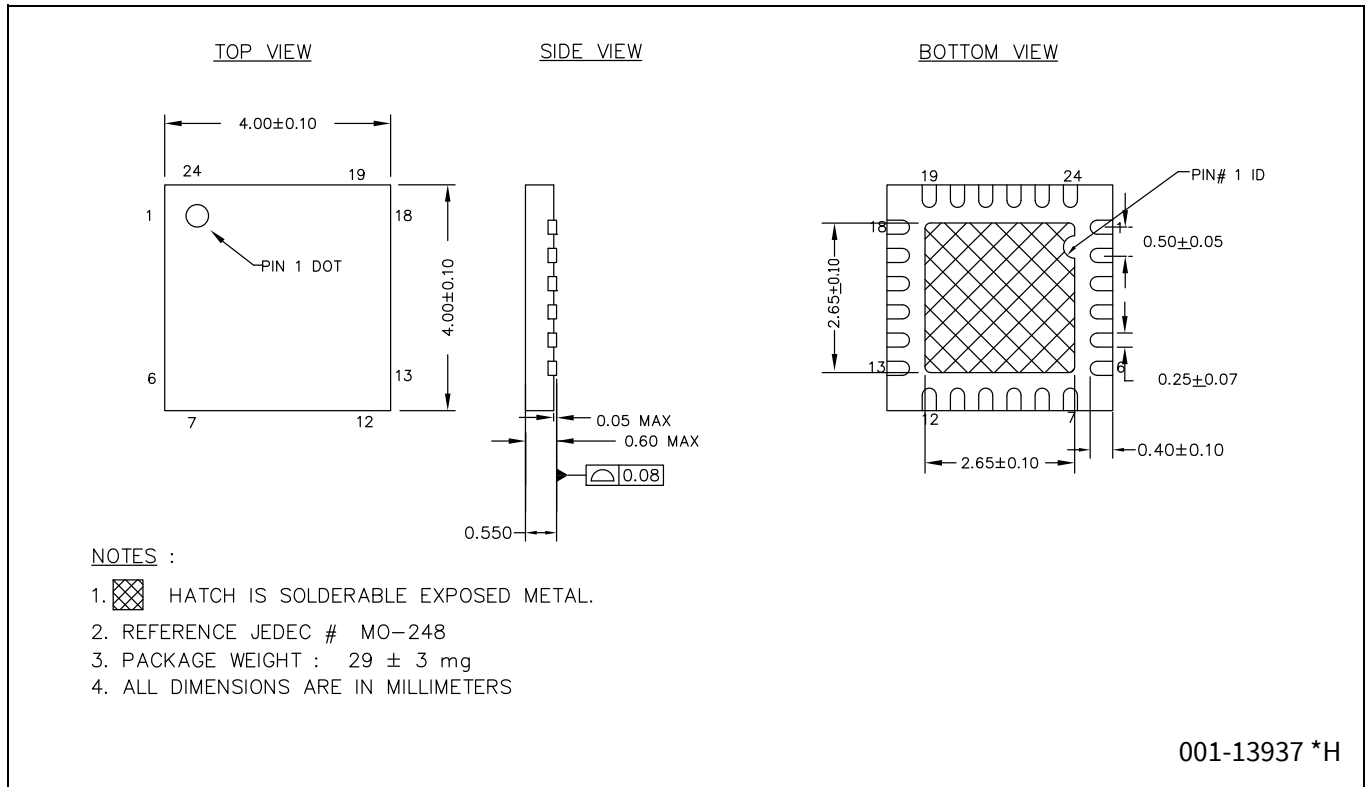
24L QFN 4×4×0.60 MM LQ24A/LQ24B 2.65×2.65 EPAD (SAWN), PACKAGE OUTLINE, (PG-VQFN-24)
